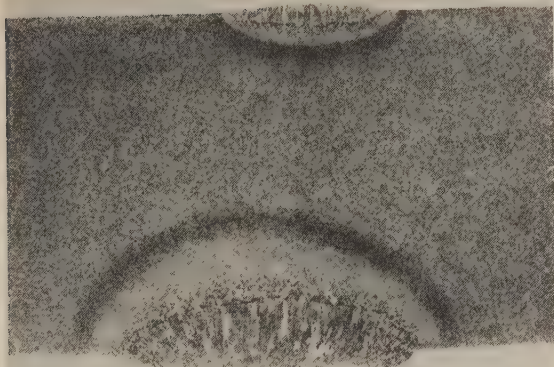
TRANSVERSE CROSS SECTION OF WELD SAMPLE EMPLOYED IN SECTION IV
